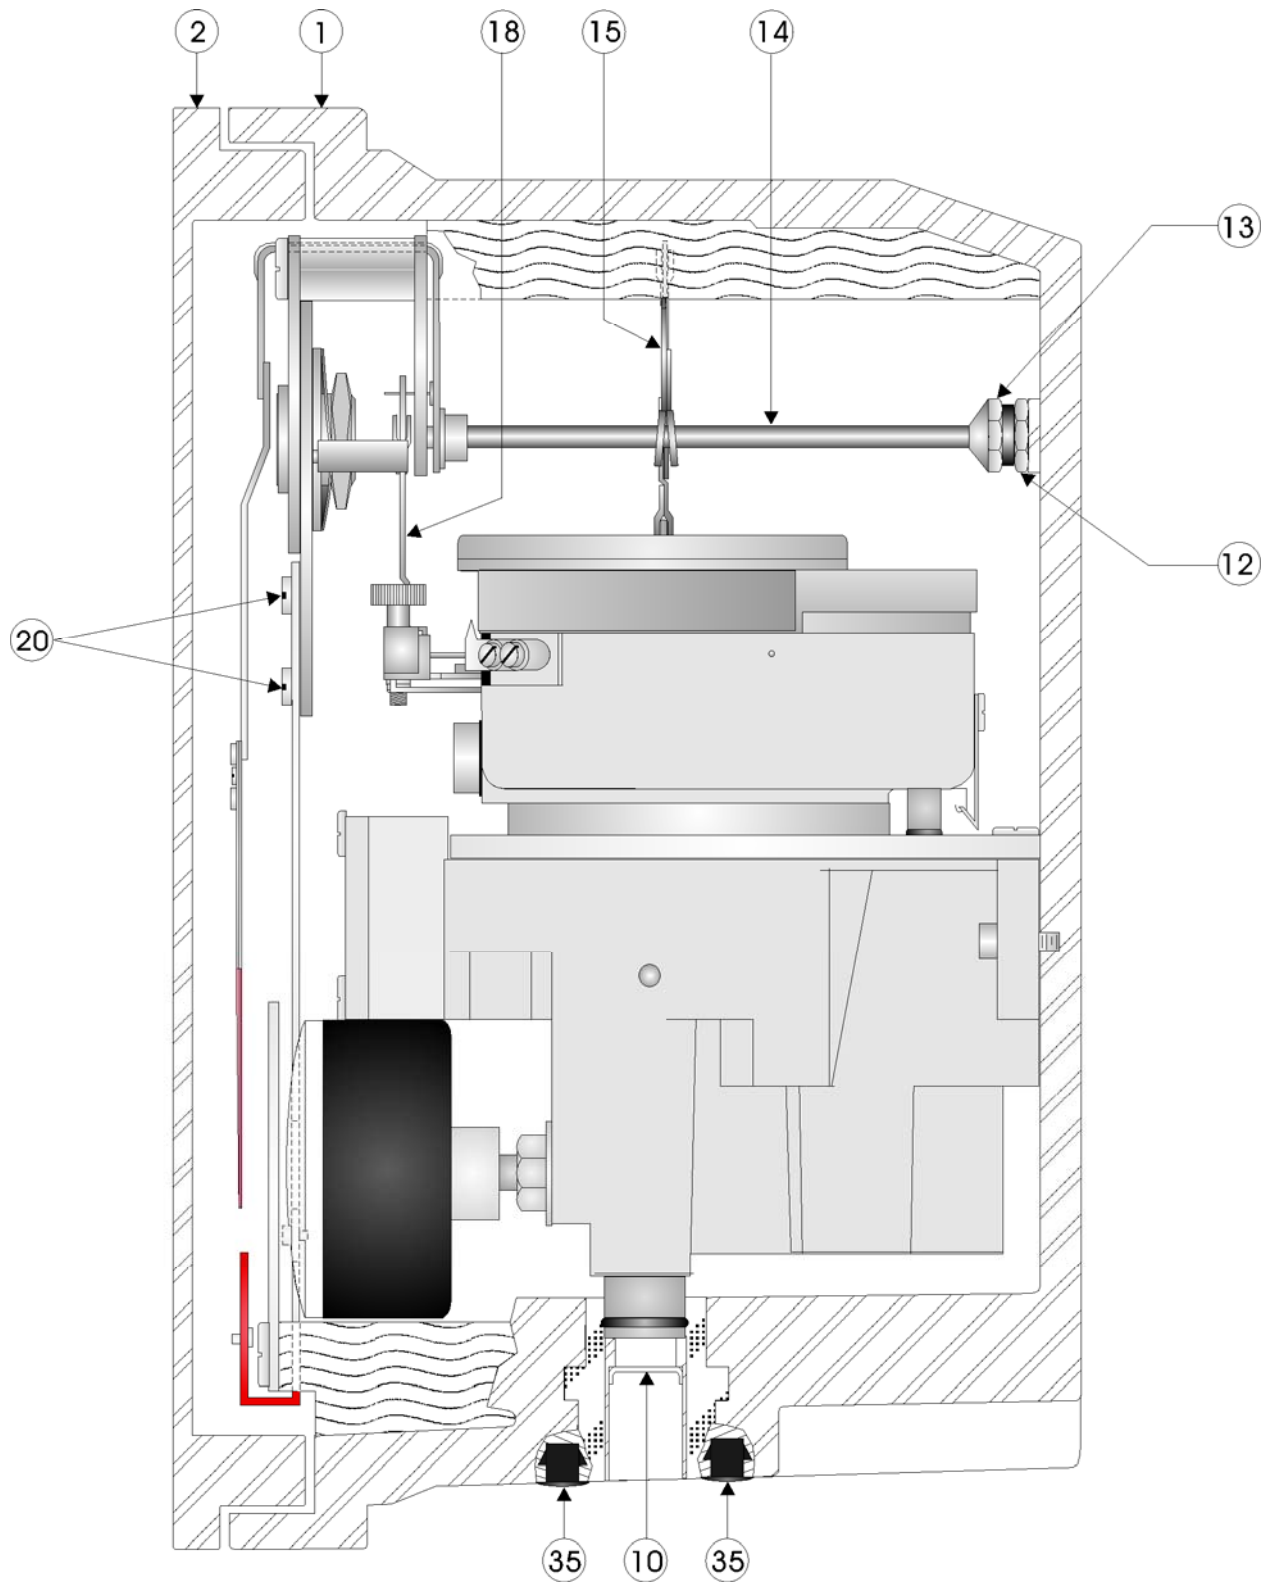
B - Basic Instrument Assembly (Measuring System Omitted)
